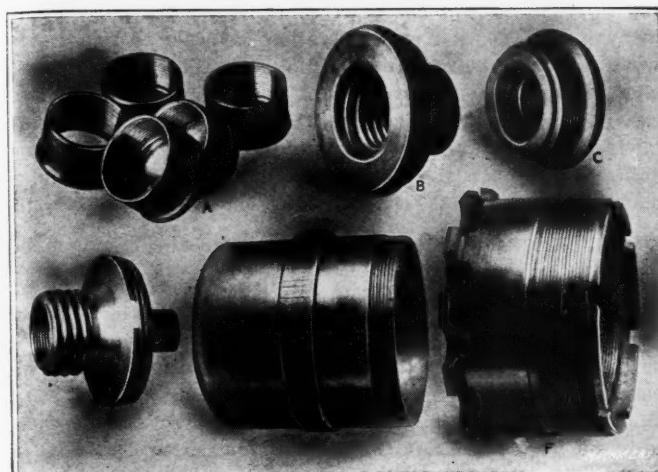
Miscellaneous Examples of Thread Milling performed on Machine shown in Fig. 11
